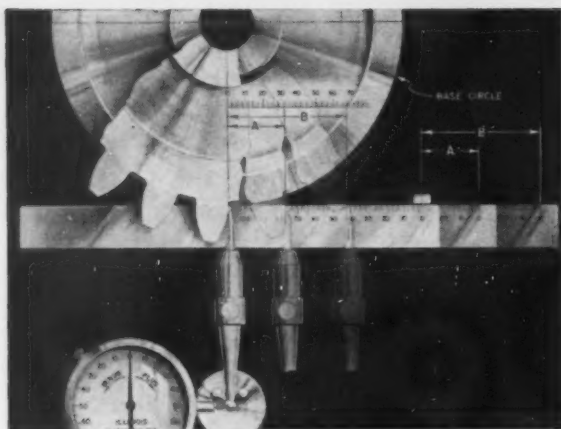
Scale measurements of involutes show line of contact between two rolling gear teeth.
